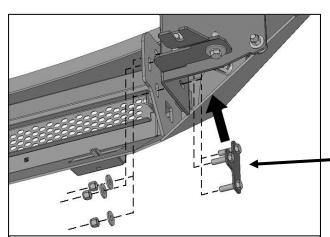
Loosen body bolt (arrow). Slide passenger/right Support Bracket under bolt head. Models with tow hooks, leave rubber bushing in place on bottom of frame
